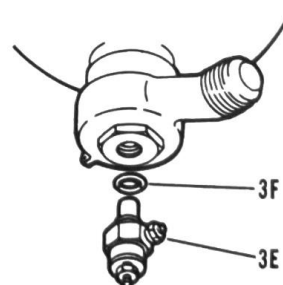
Assembly30402102 AssemblyDetail BFigure 54A. Engine Fire Extinguisher System14-26B1
